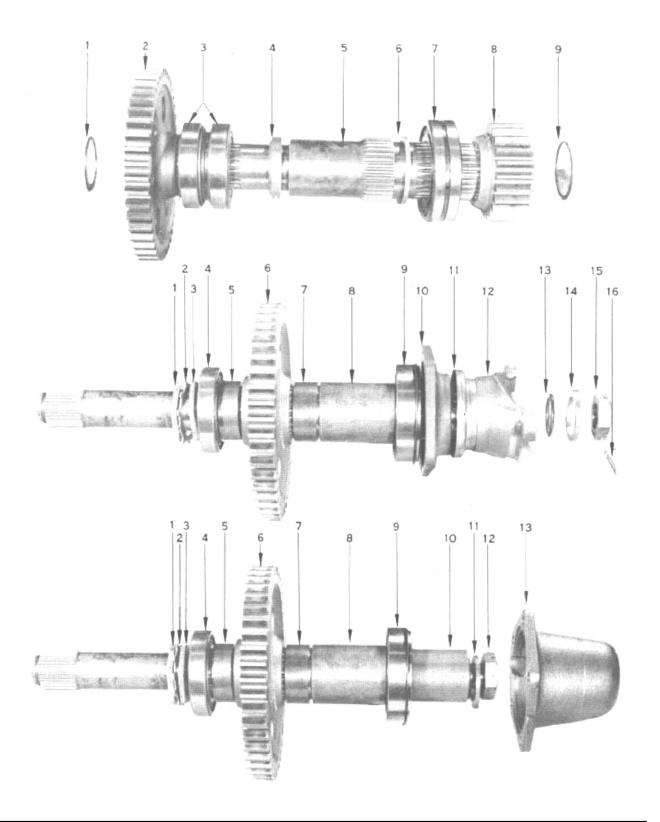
Install new O-ring on output shaft bearing cap. Install bearing cap and shims.
